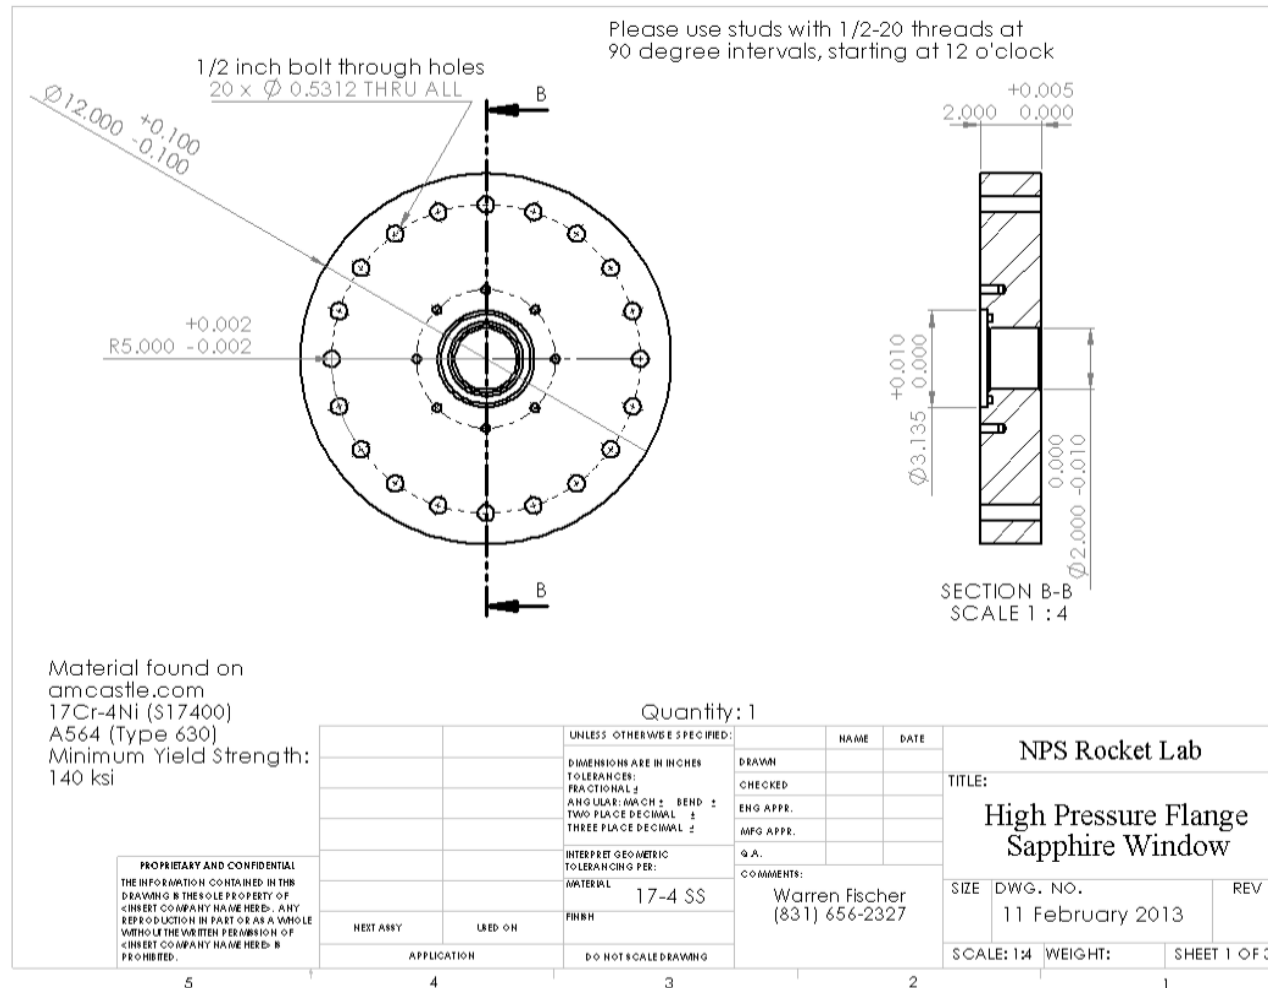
Optical Window Flange Fabrication Drawing (View 1 of 3)
